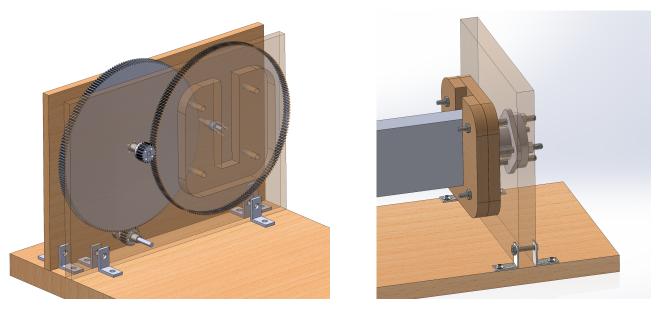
Images of the final CAD model for both sides of the structure. The Motor-side structure is shown left and the sensor-side structure is shown right. Parts have been made transparent for easier viewing of the internal assembly.
